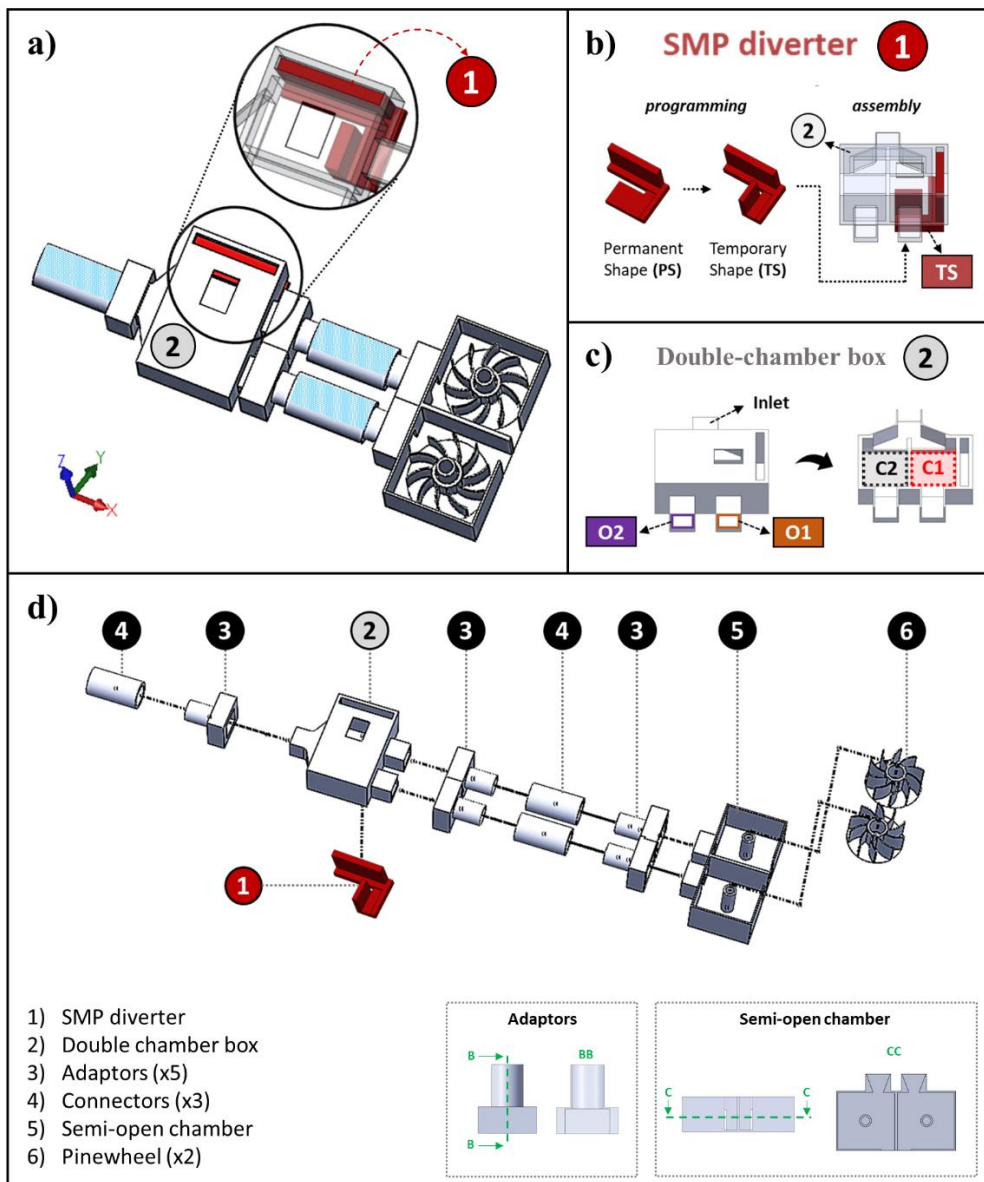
a) CAD model of the prototype; detailed views of b) component 1 (SMP), with relative programming of the vertical configuration (TS) and final assembly into C1
